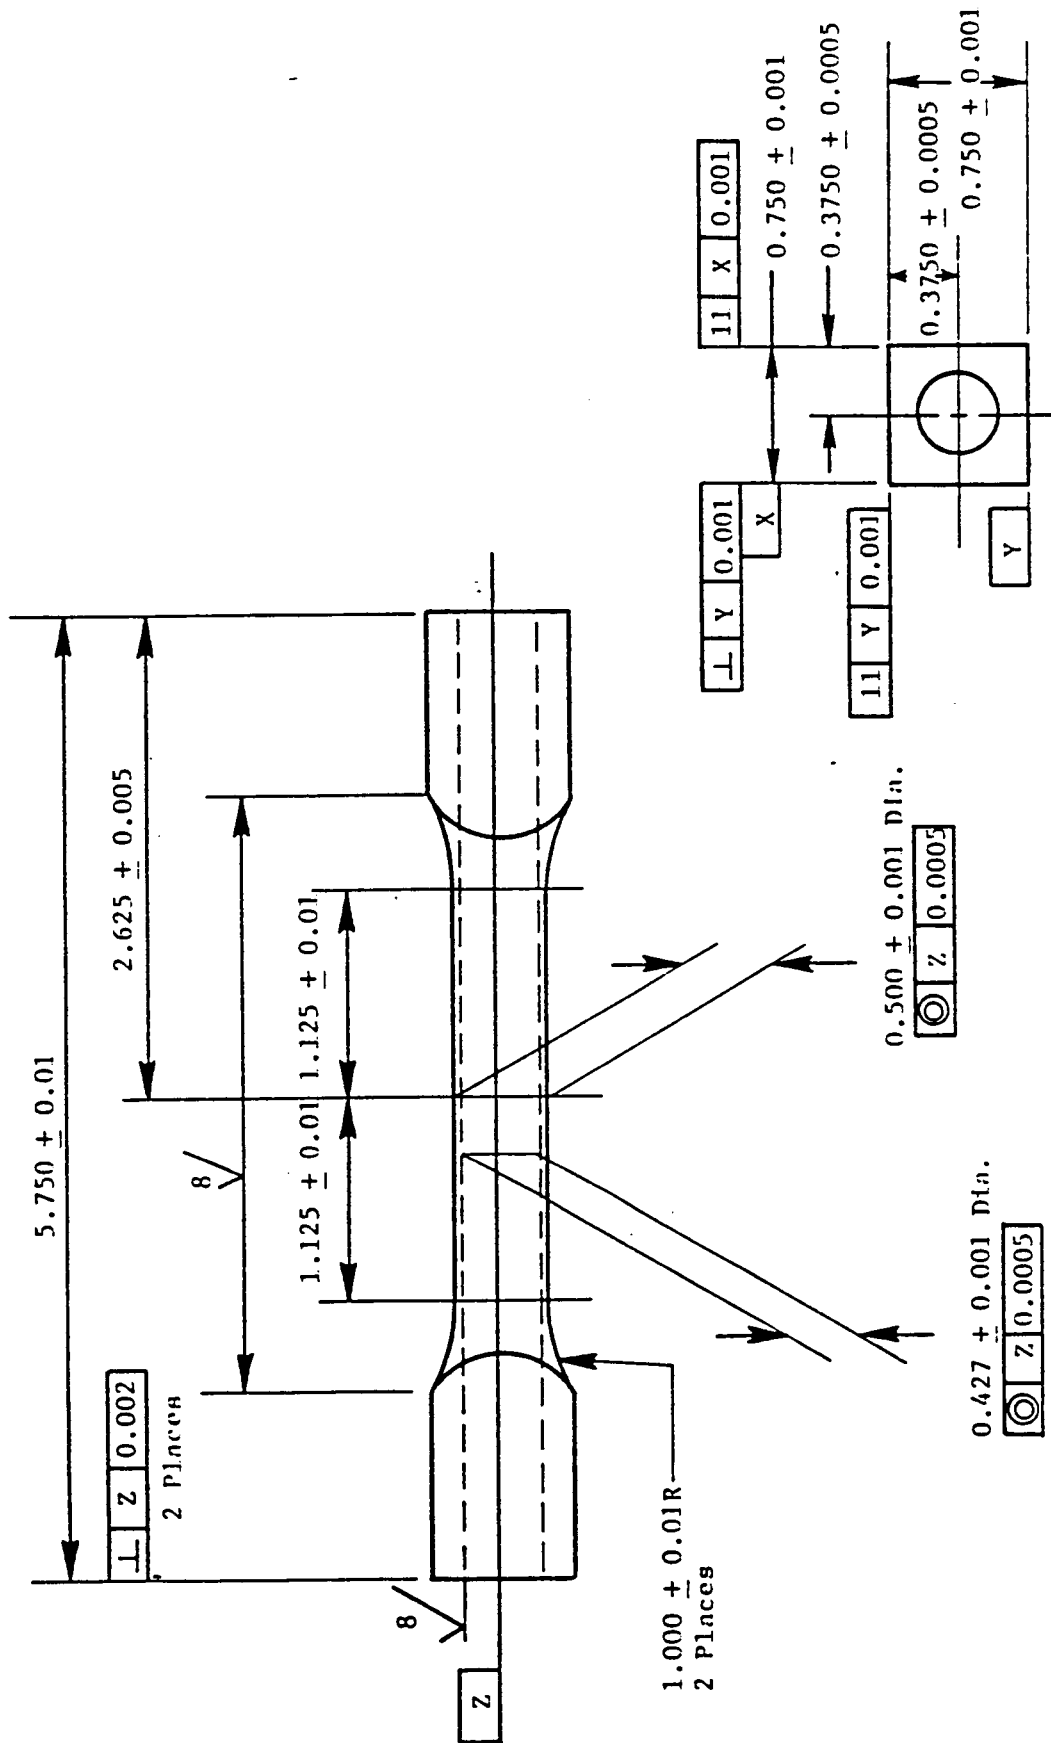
Axial-Torsion Thin Wall Test Specimen.
